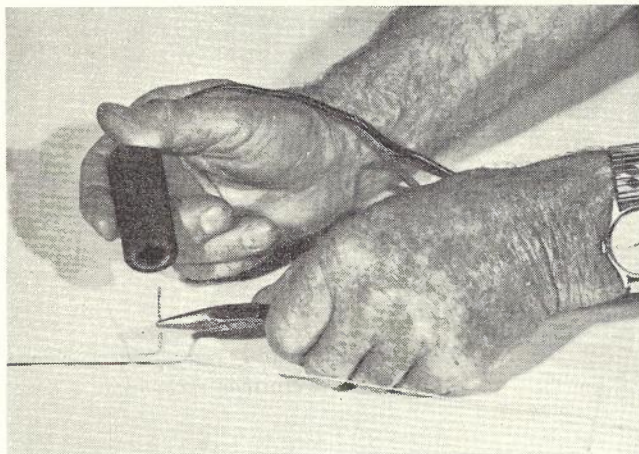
Paper-insulated aluminium to aluminium conductors about to be tip welded. The carbon rod is connected to the negative 24 Volt battery terminal.
